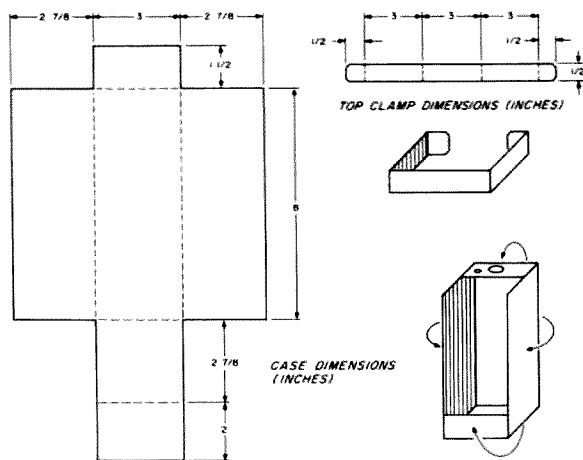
Aluminum case, clamp dimensions, and fold lines.
